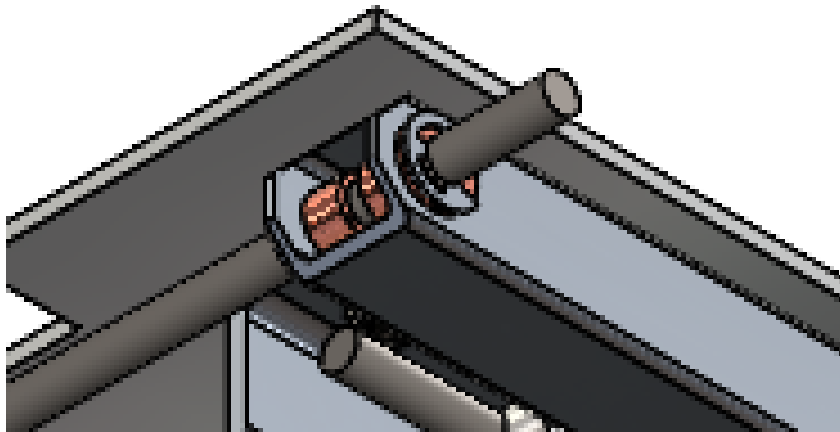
The 1/4" retaining ring assembled to the angle shaft.
